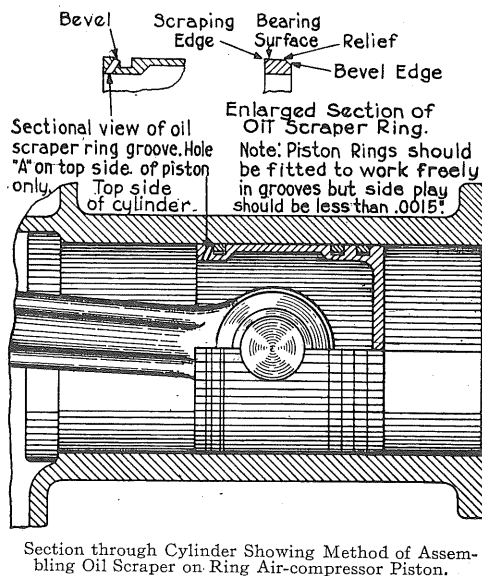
Arrangement of Piston Rings in Piston and Chamber
